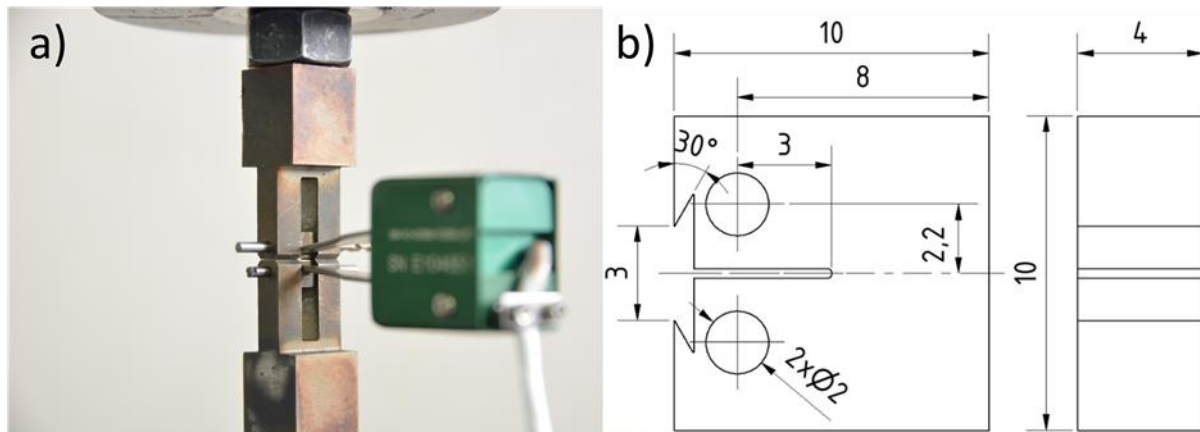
a) Fracture toughness testing setup; b) MCT specimen geometry.
